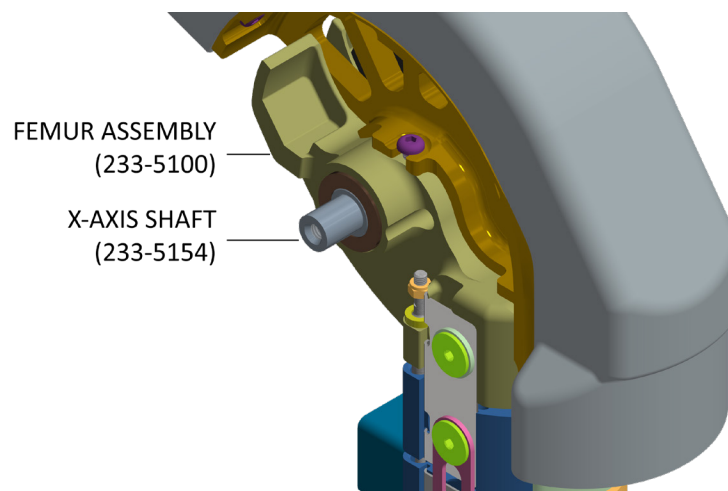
Slide the Shaft into the Femur Top Mounting Bracket
